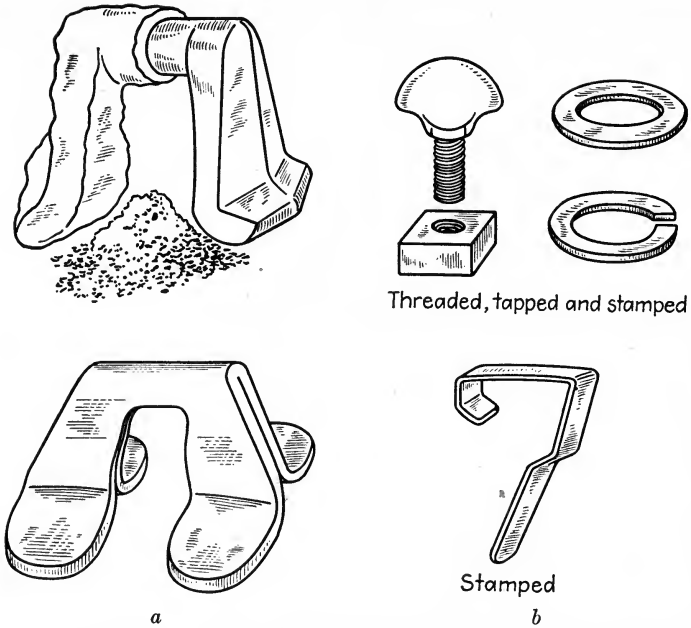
a*. The change in design of this lug so that it could be stamped instead of machined saved 8,000 machine-tool hr. and 17,000 lb. of steel on a lot of 100,000 pieces. *b*. The changed design allowed this clip to be made 150 times faster. The weight is about  $\frac{1}{8}$ .
